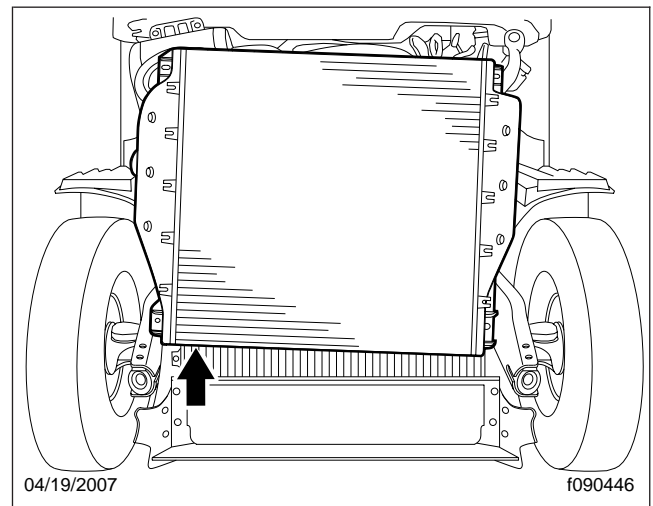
, 47-Tube CAC Tilted for Removal, Front View
